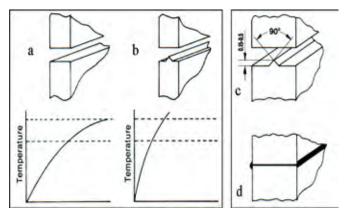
Influence of concentrator upon the welding process: a - Welding in near field, by contact; b - Welding in far field, by transmission.
